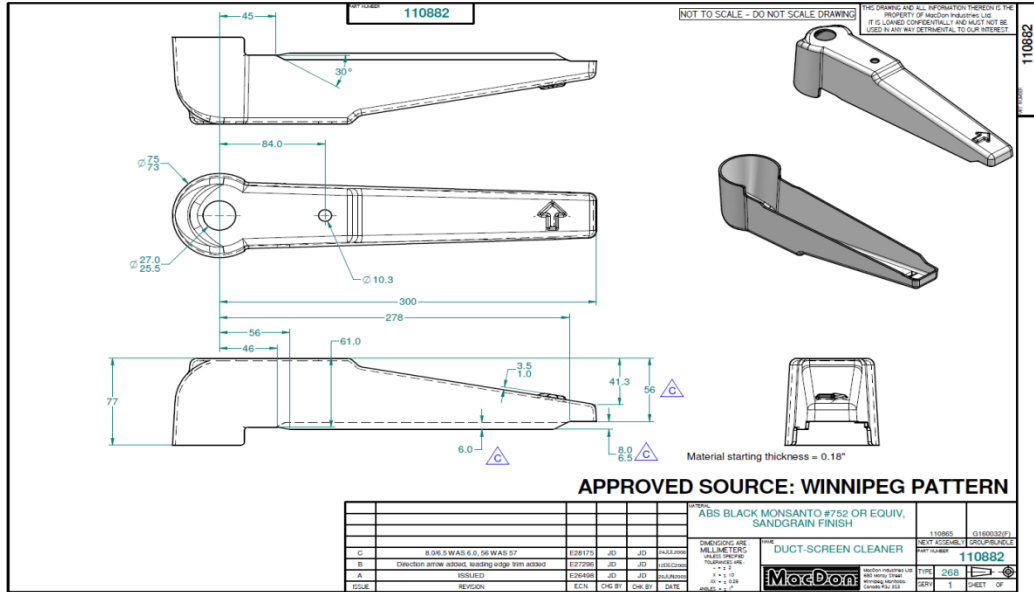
Duct-screen cleaner drawing provided by MacDon Industries.
